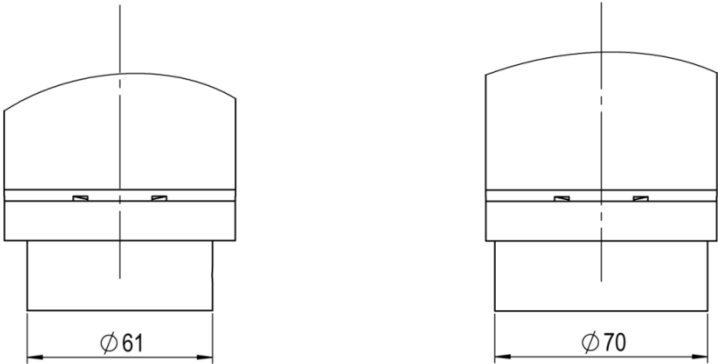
Mounting Adapter for FIX30, WS425FIX60 (Left), and Mounting Adapter for FIX70 (Right)
